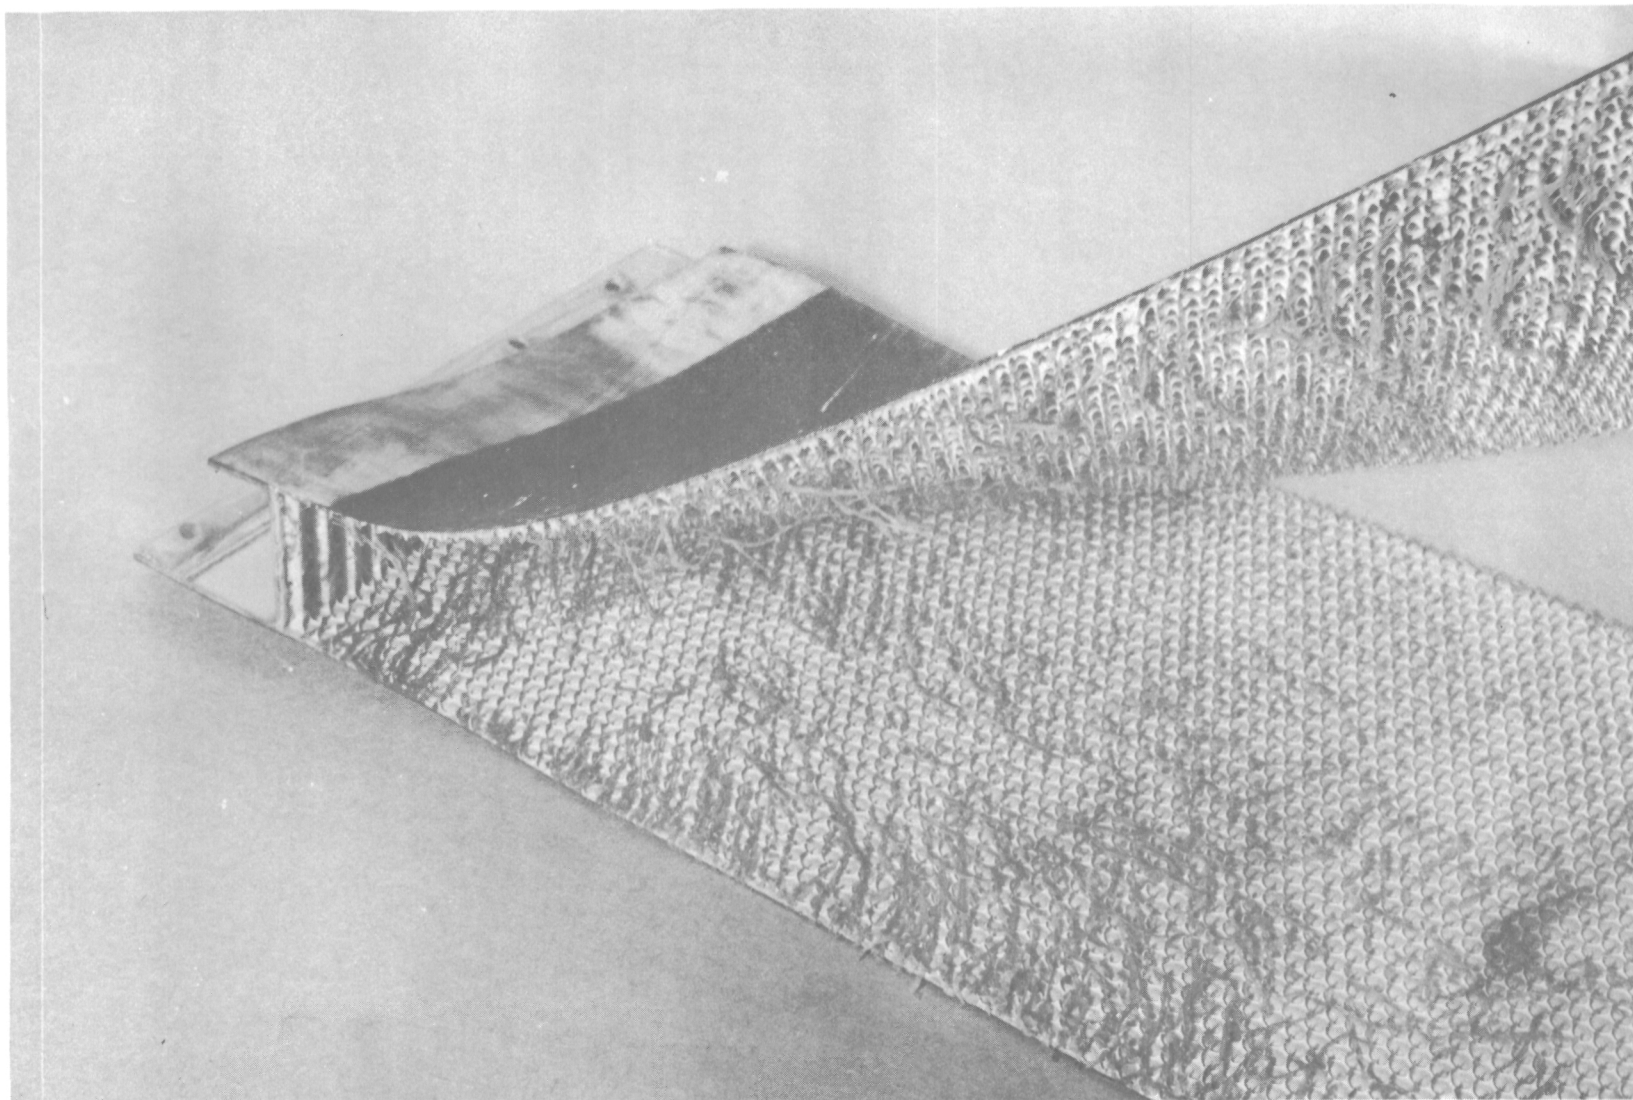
Adhesive Filleting and Core Node Bonding
